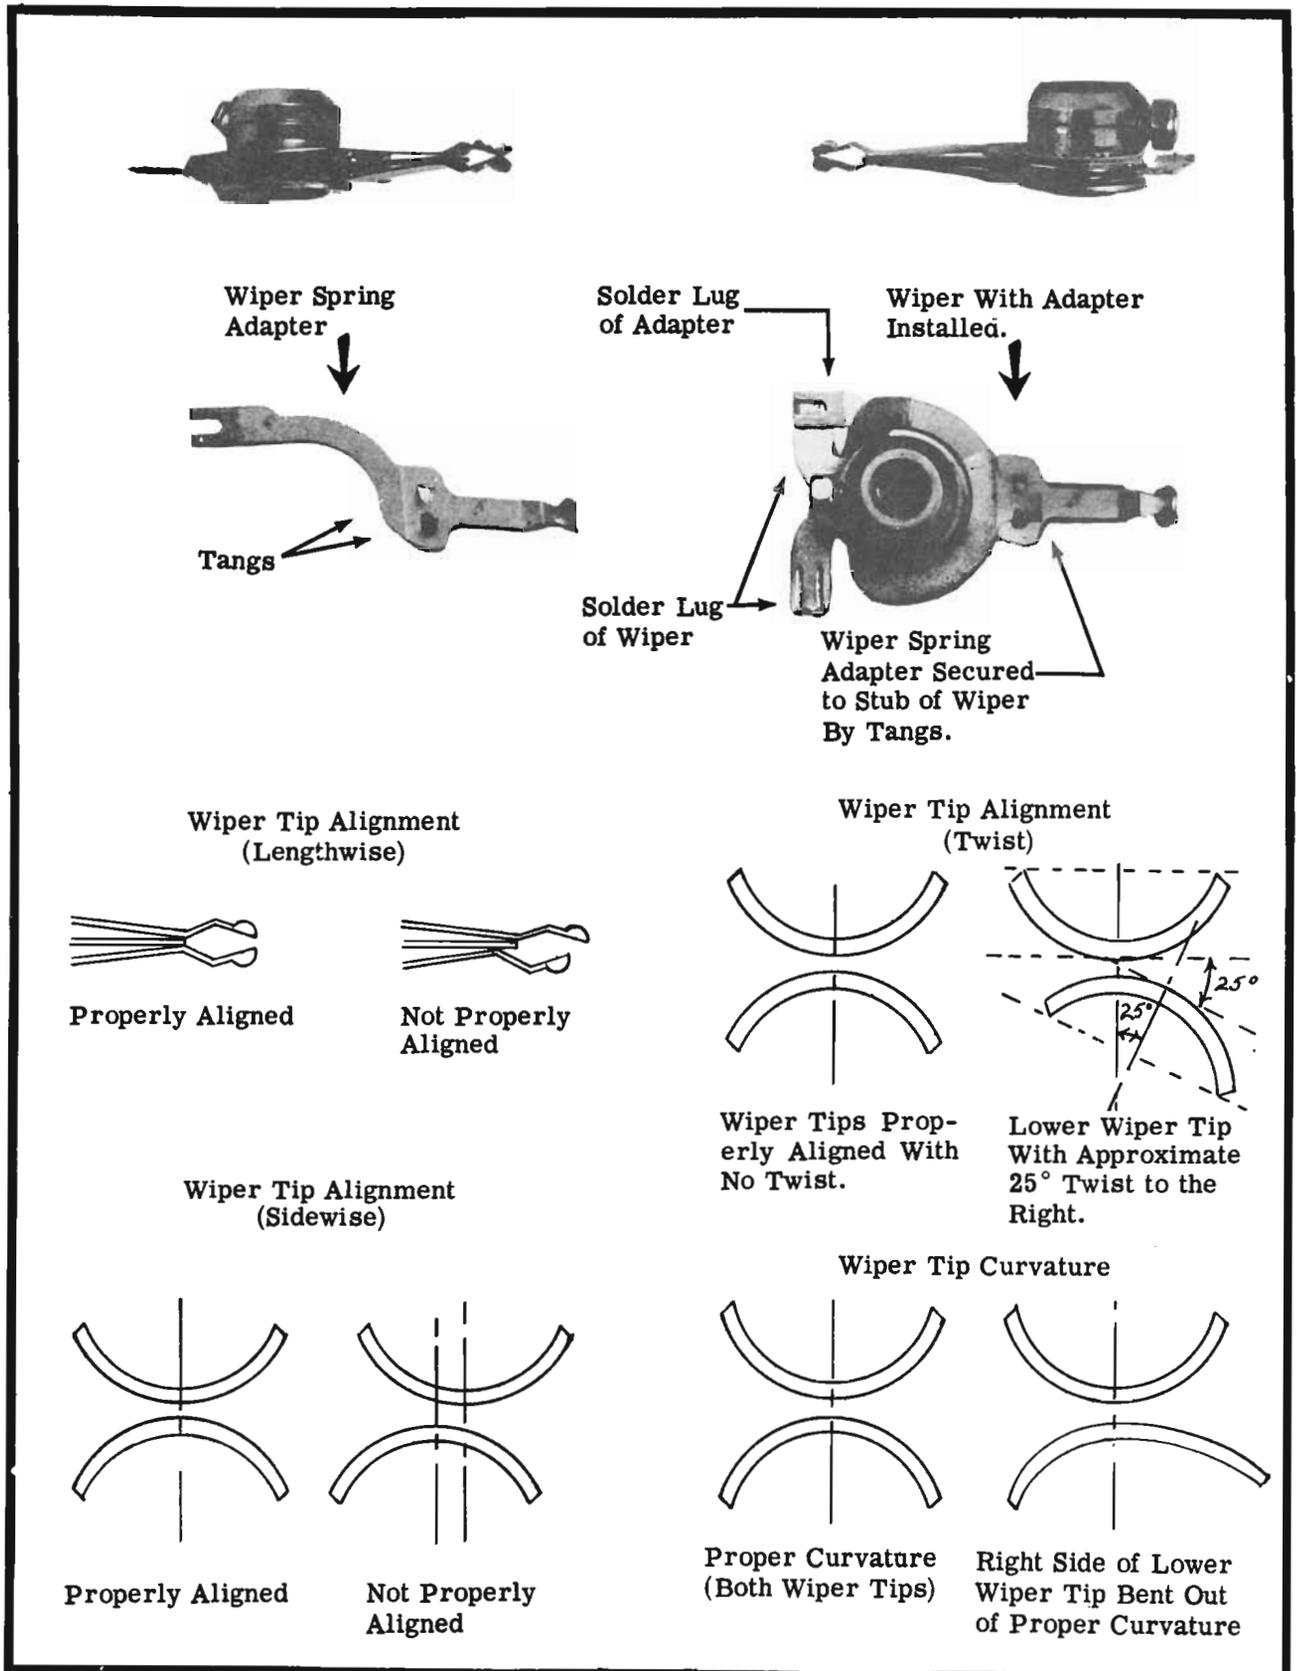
The Above Are Wiper Spring Assemblies, Wiper Spring Adapters, and Examples of Alignment.
